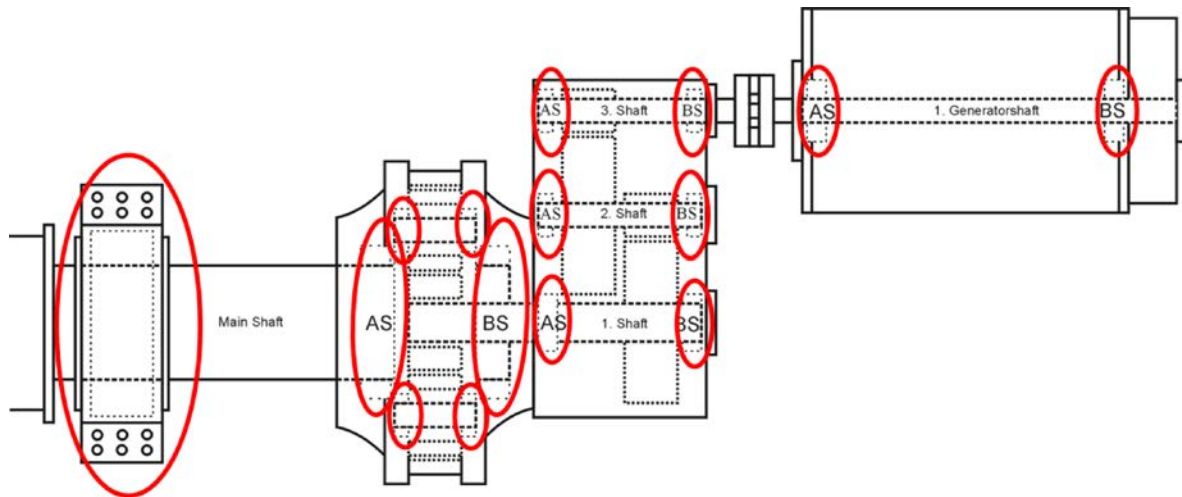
Layout of the most popular wind turbine drivetrain with marked rolling element bearings (GAJETZKI, 2006).
